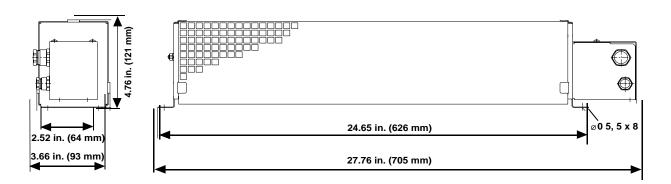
Mounting Dimensions for 460V External Shunt (P/N M.1302.7060)
